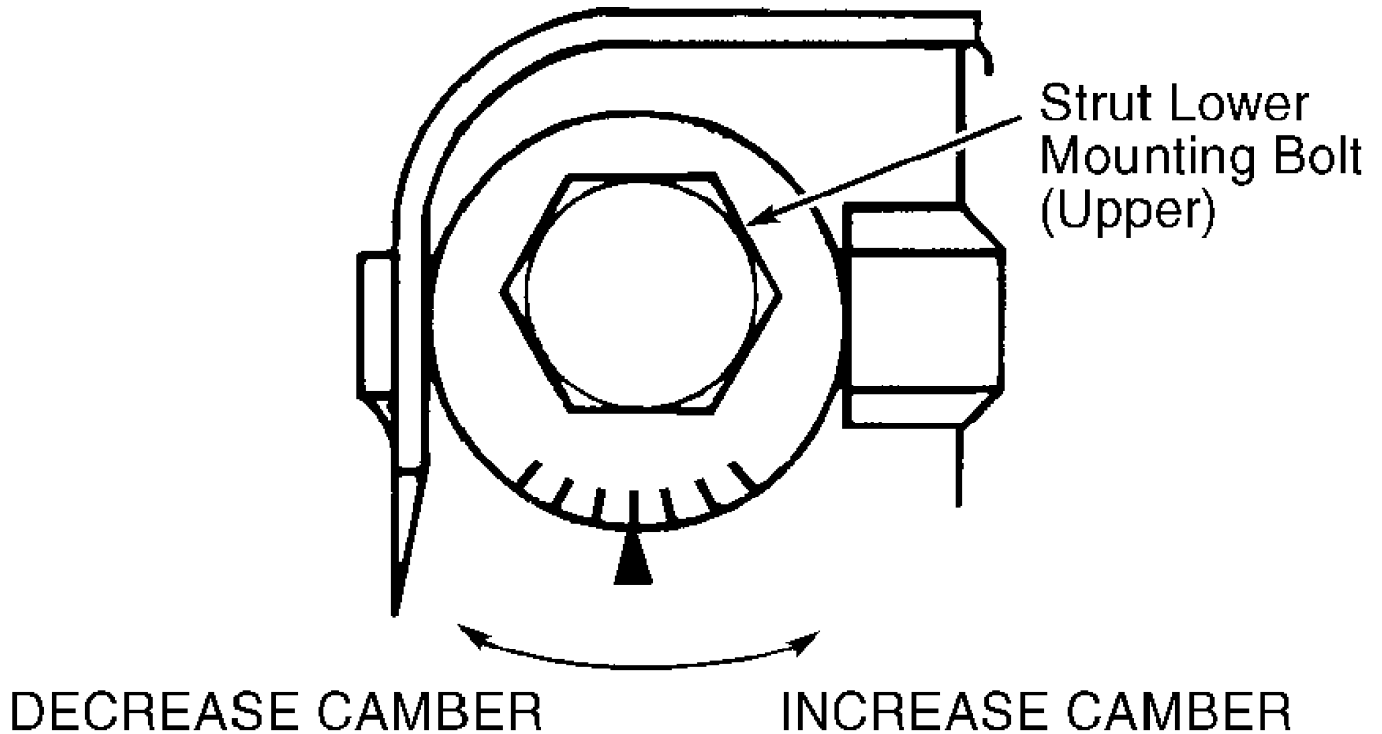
Adjusting Camber & Caster (Pickup & Ram-50 Shown; Montero Camber Adjustment Similar)
